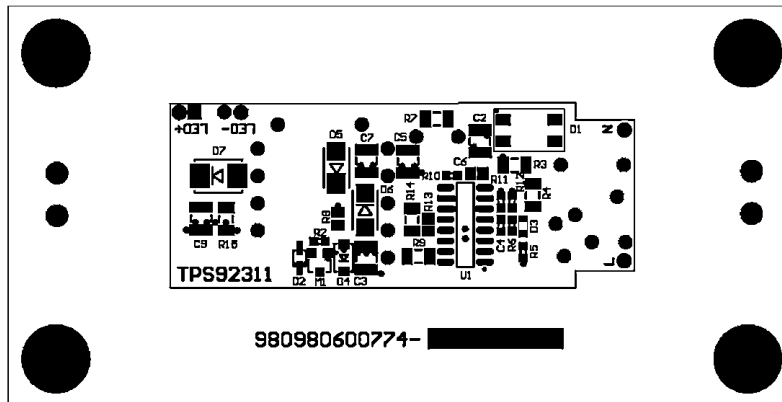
Bottom Layer Assembly Drawing (Bottom View)
